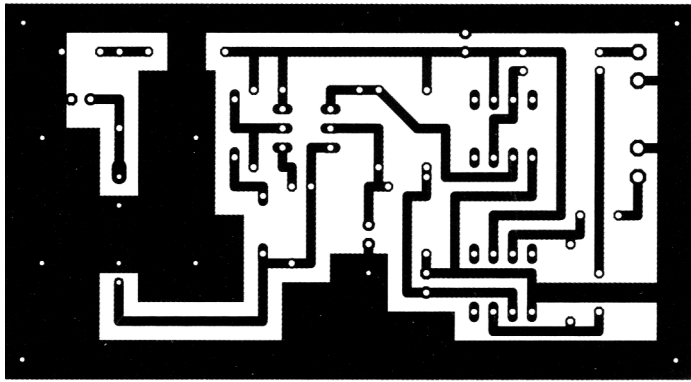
Receive head PCB foil pattern, full size (two op-amp version)
